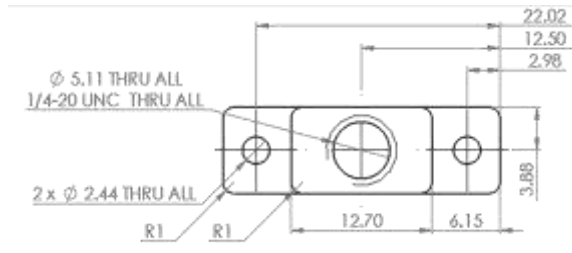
Basic Mechanical Dimensions of the Tripod Mount adapter (all dimensions are in mm [in])
